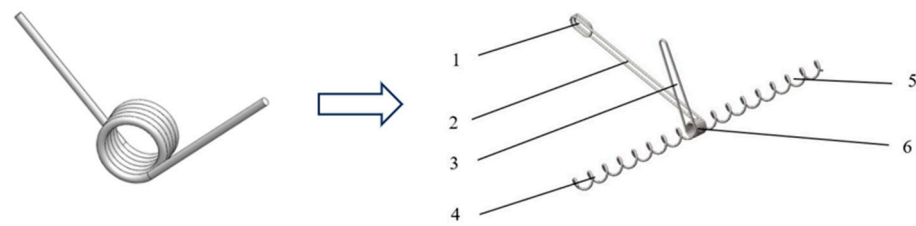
Analogous design of torsion spring hooks. 1. Limit Ring. 2. Fixed Part. 3. Movable Part. 4. Left Compression Spring. 5. Right Compression Spring. 6. Torsion Spring Part.
